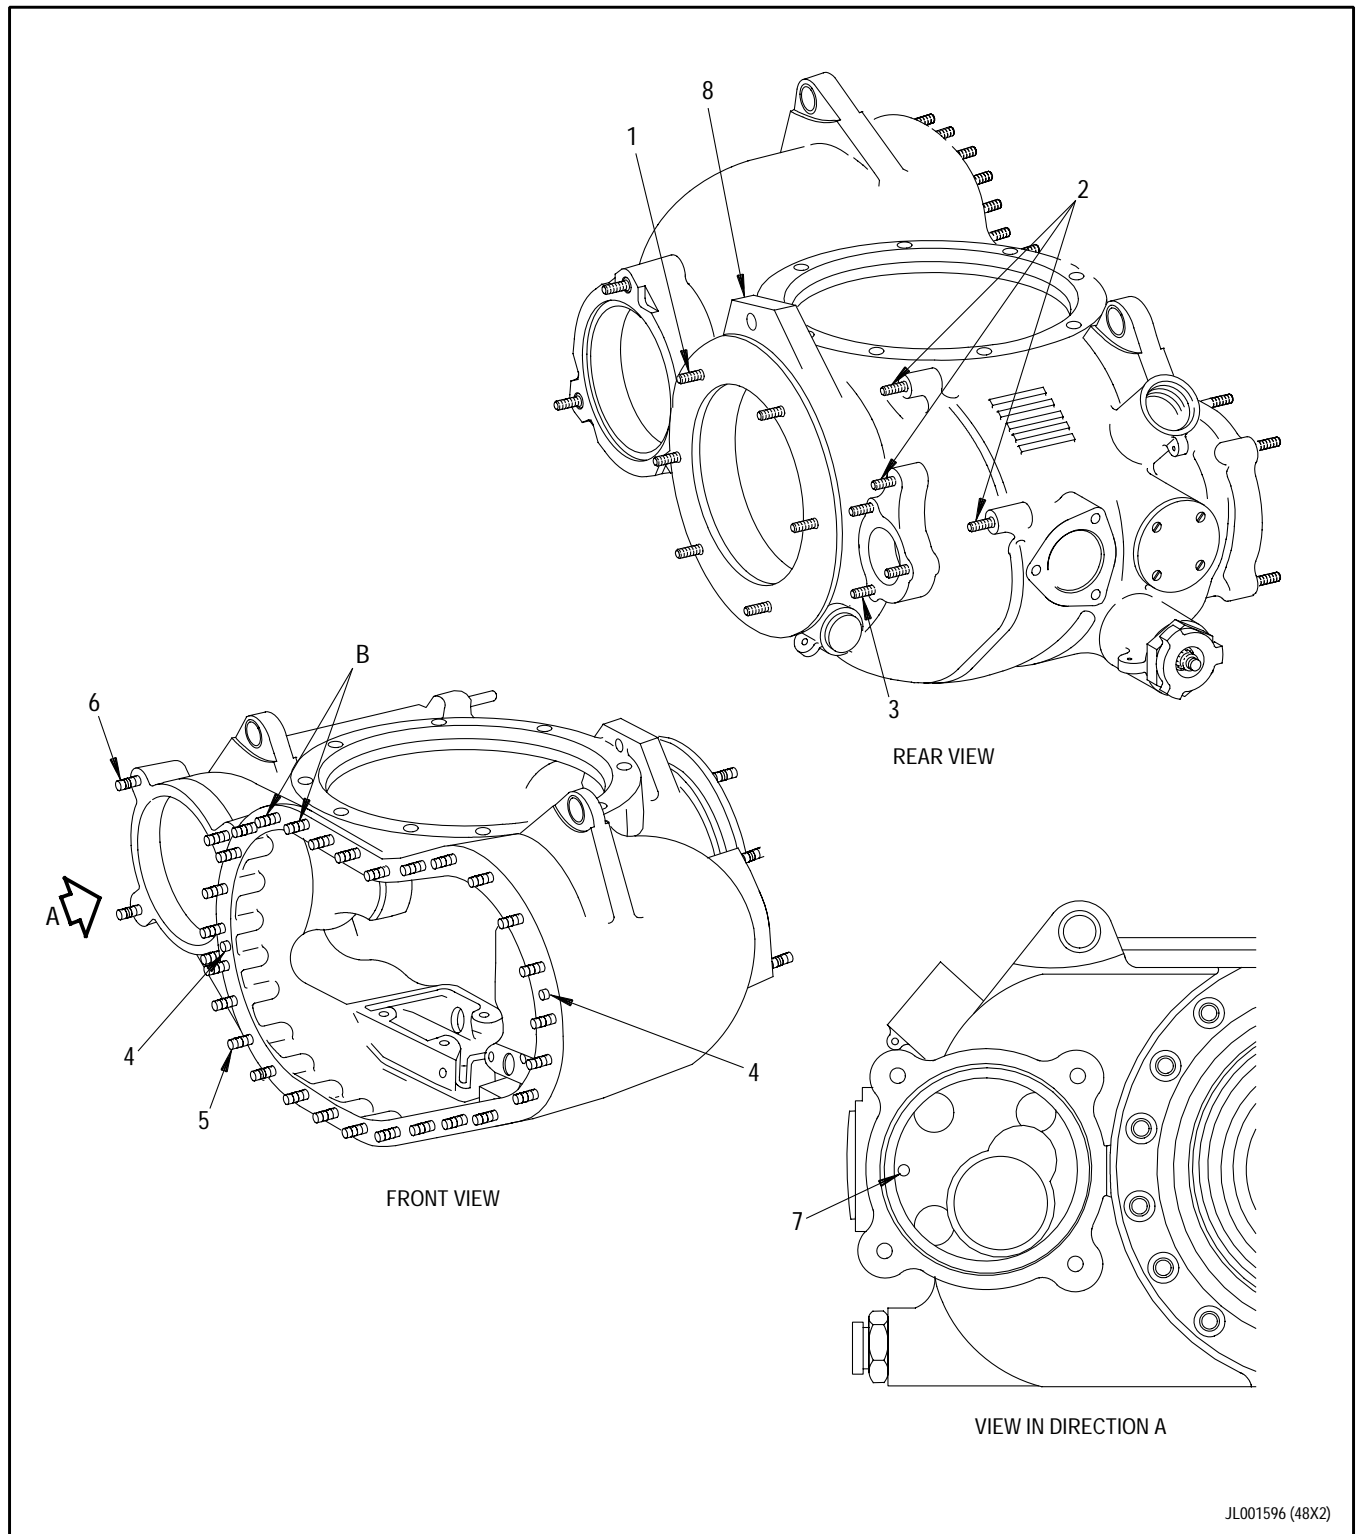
Gearbox (Rear) Housing - Stud and Dowel Pin Replacement
